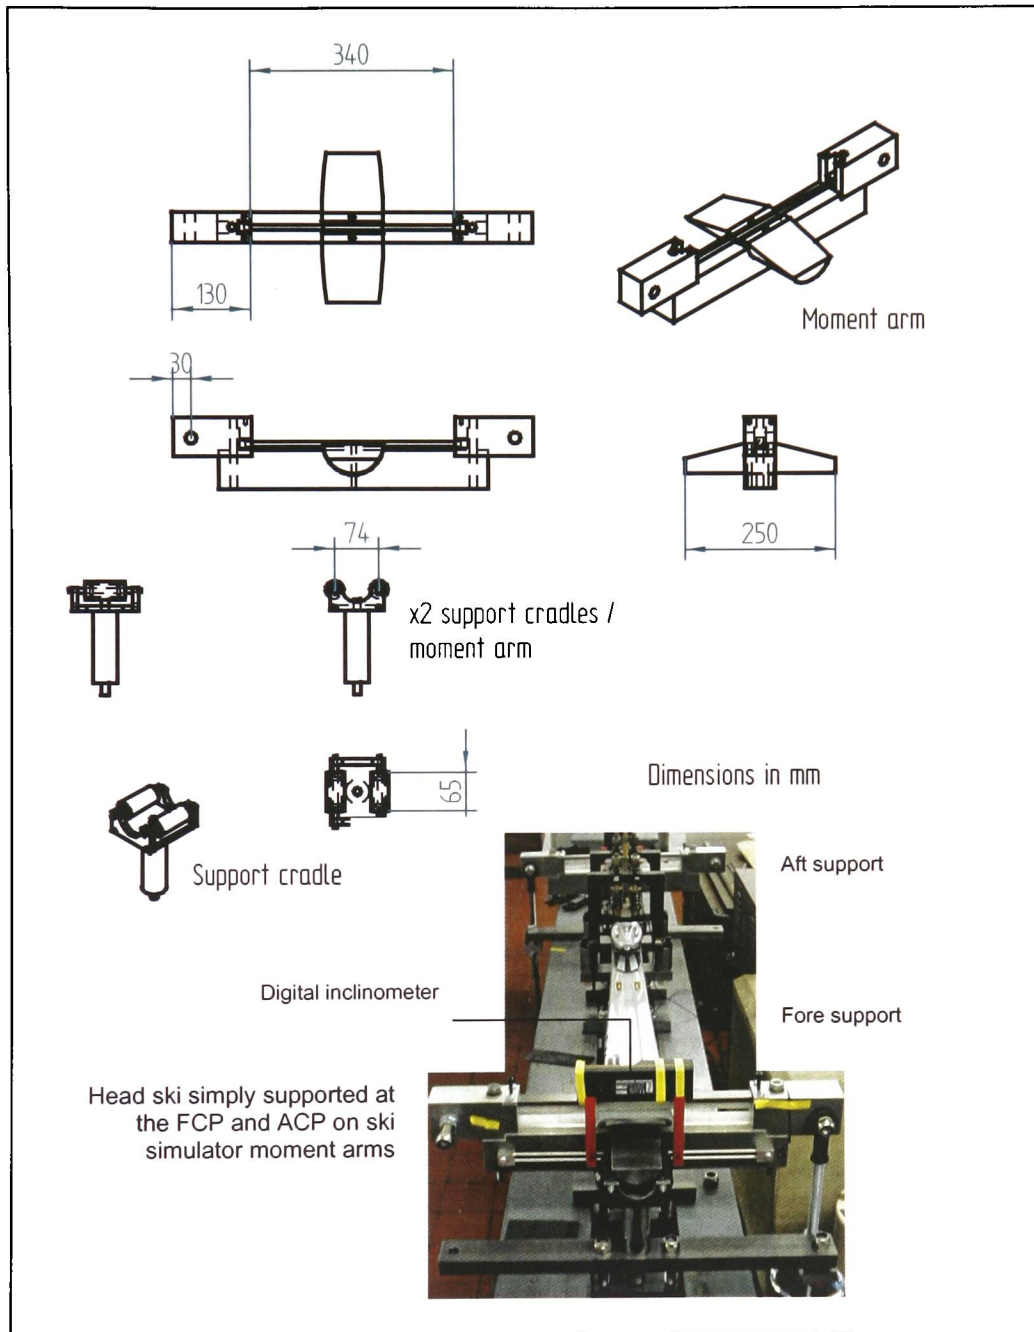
Ski simulator moment arm and roller bearing cradle
